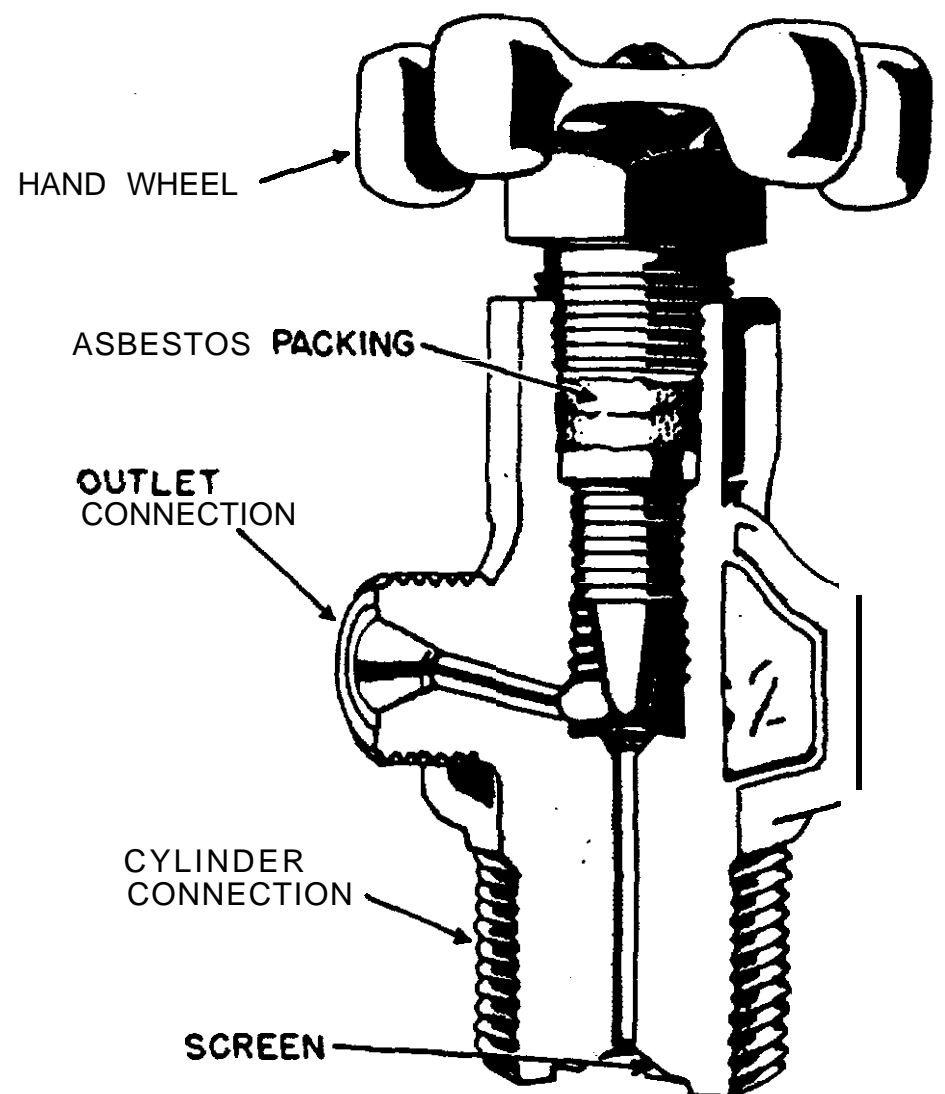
View 2. Cutaway view of acetylene cylinder valve.
